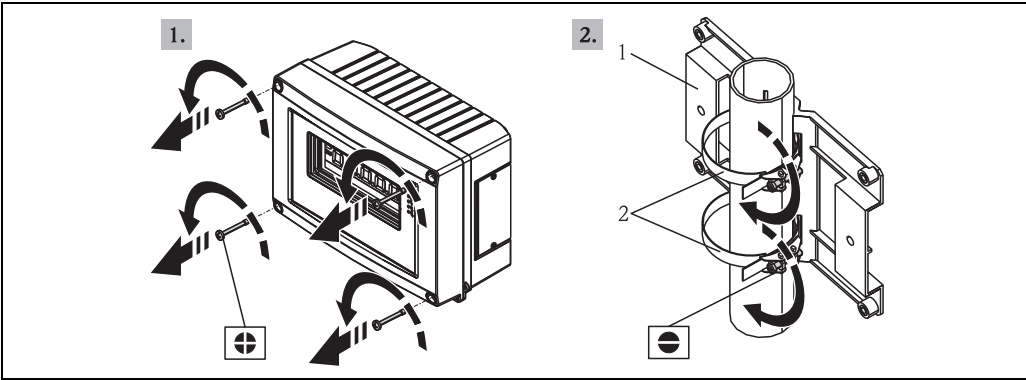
Mounting the field indicator on a pipe with mounting bracket, steps 1.-2.
